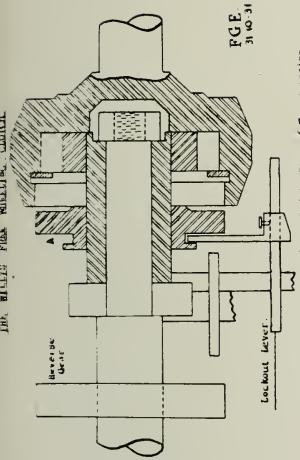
Free-wheel Unit Mounted to Rear of Transmission.
